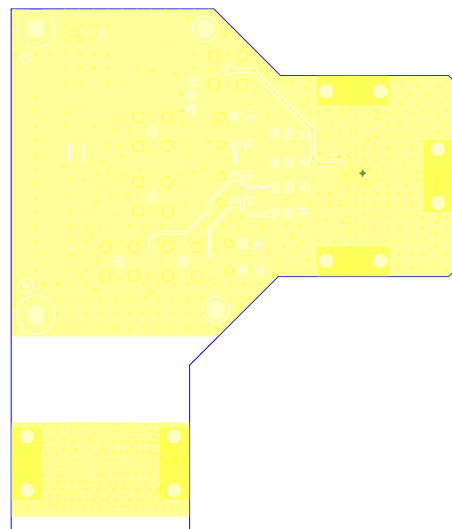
EVAL-ADGM1001SDZ Component Side, Bottom Side PCB Drawing (Layer 4)
